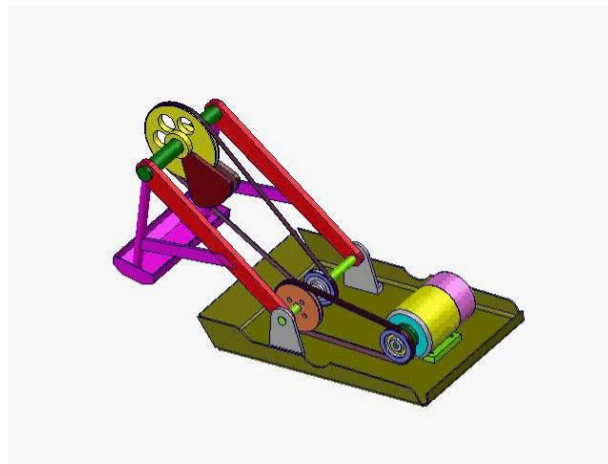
The mechanism in the soil compactor is later one my inspiration for prototype ver.2.0 (MachineTo).
